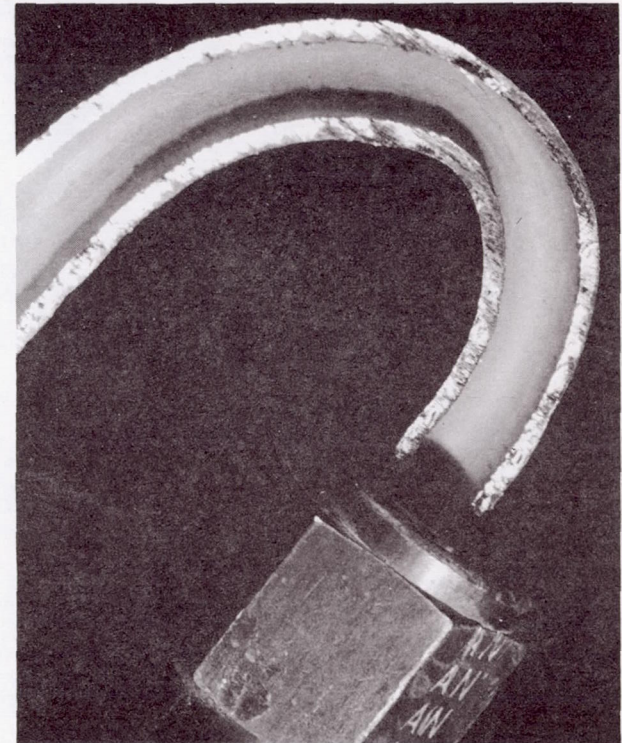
Oxidizer Fill and Drain Tube Crack, Internal View
